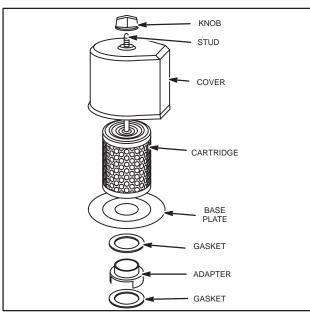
CARTRIDGE TYPE, HORIZONTAL AND VERTICAL CRANKSHAFT
